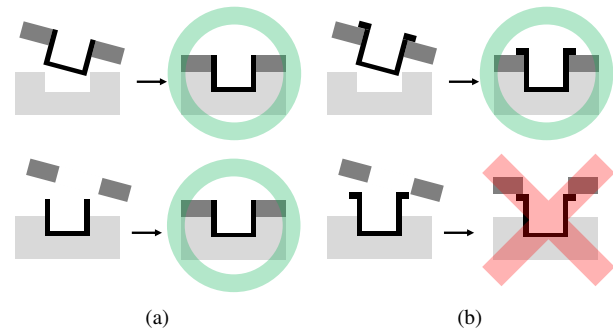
Illustration for the assembly sequence of the layered peg-in-hole.
